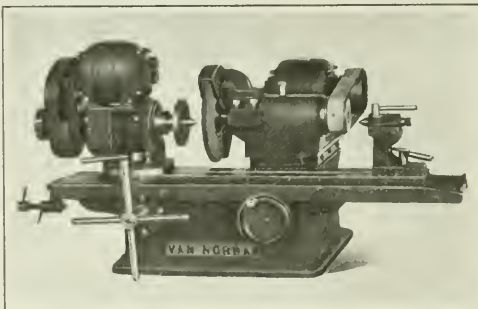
"Relio" Bench Grinding Machine developed by the Van Norman Machine Tool Co.
